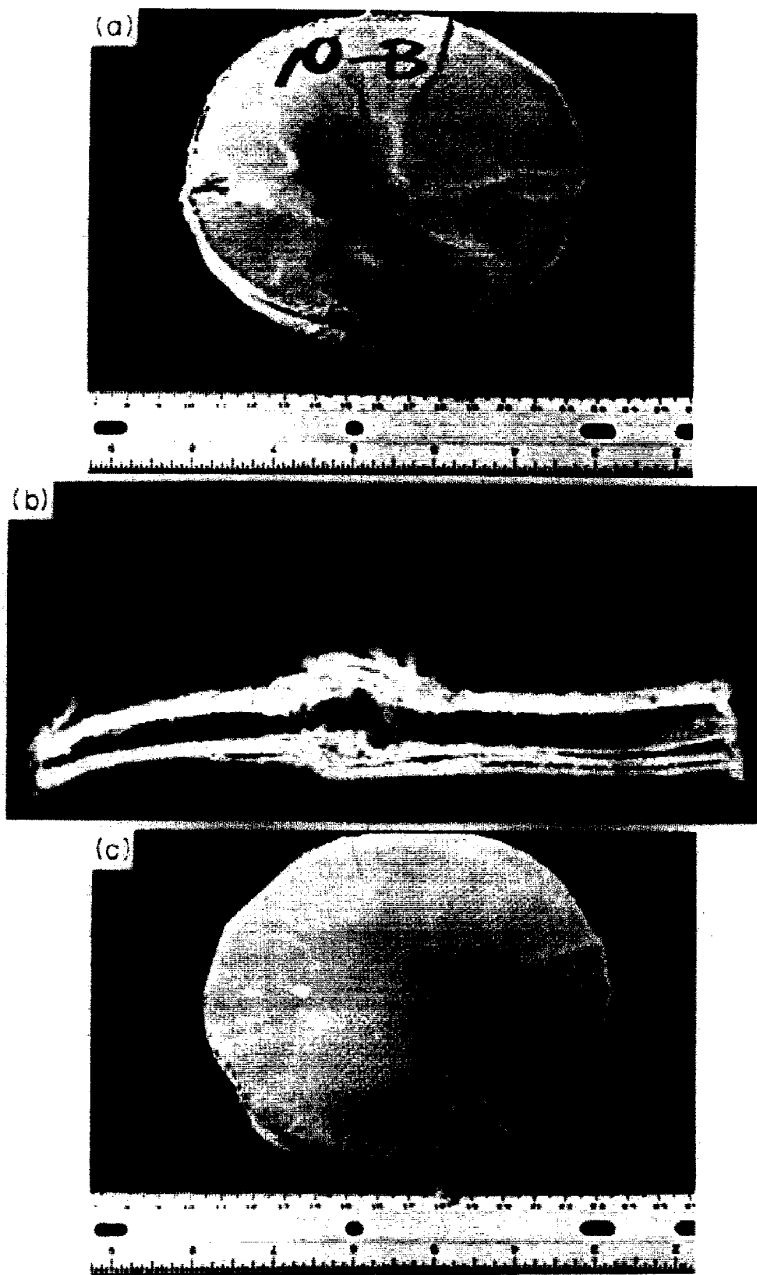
Damage to the specimen shown in Fig. 22: (a) Impact side; (b) Cross-section; (c) Distal side.
